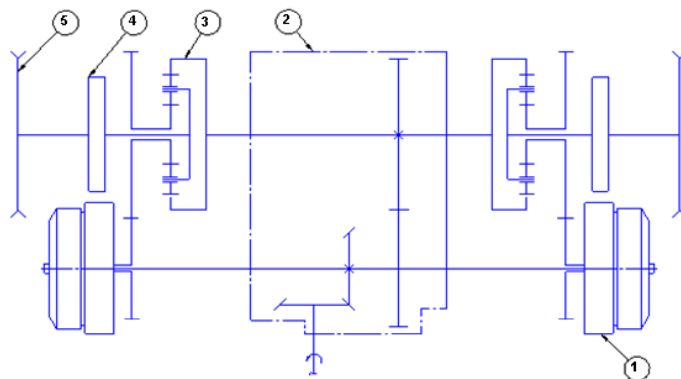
Kinematic diagram of MTLB regular transmission: 1 – TM; 2 – gearbox; 3 – summing planetary gear sets; 5 – final drives; 6 – driving wheels
